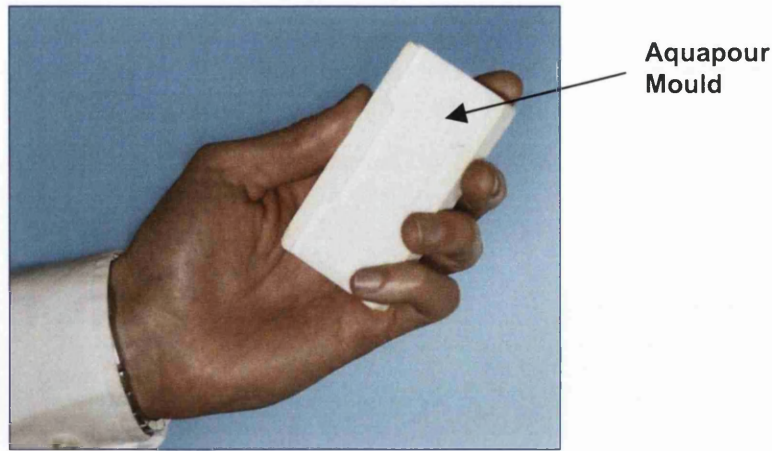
Example of Aquapour mould containing tensile test piece cavity
